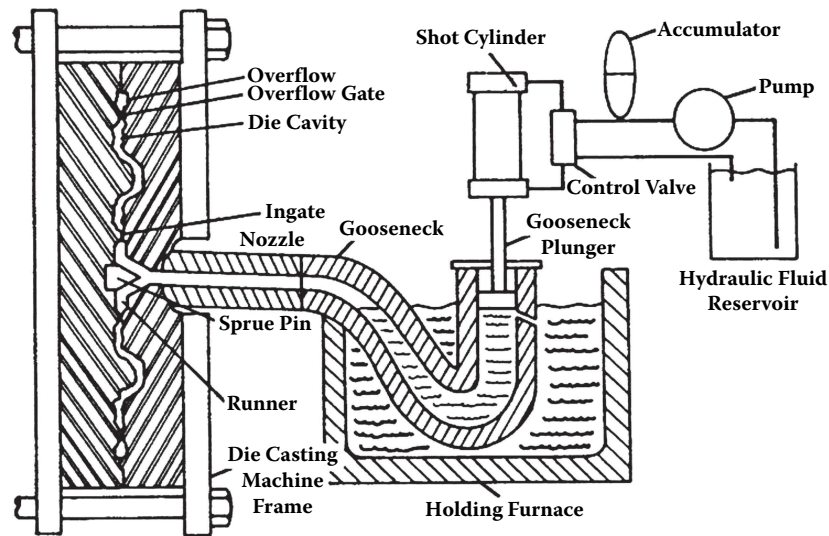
Basic components of a typical hot-chamber, die-casting system
